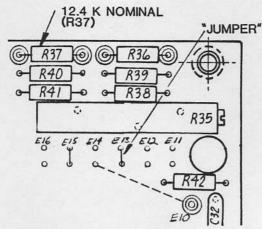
Location of Frequency Correction Compensation Jumper on Synthesizer Board Assembly.
